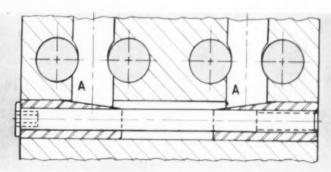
This sketch shows a design for clamping four pieces. The lower ends of the two double notched bolts A-A are cut off at
